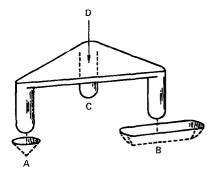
Typical kinematic locating fixture. The three ballended legs of the stool rest in a conical hole at A, a V-groove (aligned with A) at B, and on a flat surface at C.
